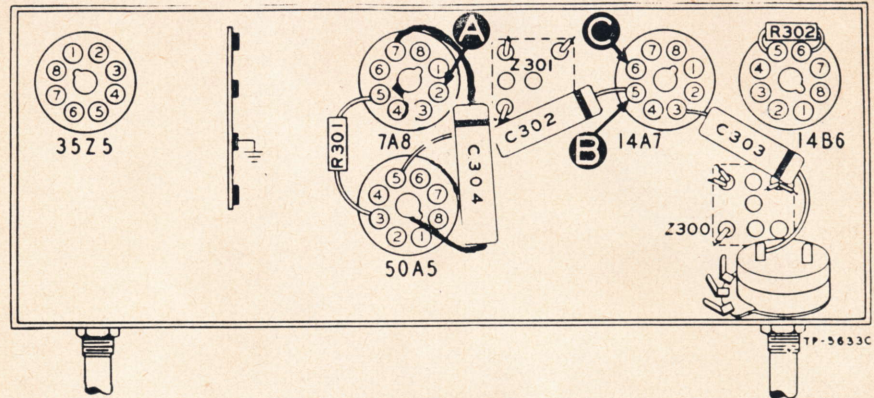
BOTTOM VIEW, SHOWING SECTION 3 TEST POINTS
